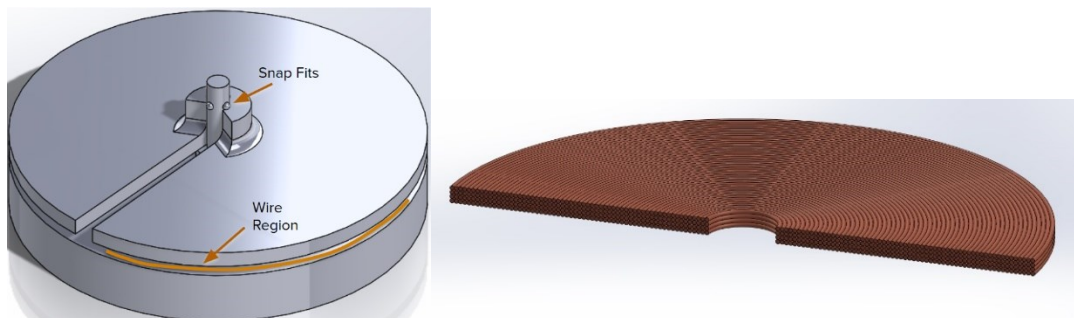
First Bobbin Design & Resulting Coil Geometry (240 turns)
